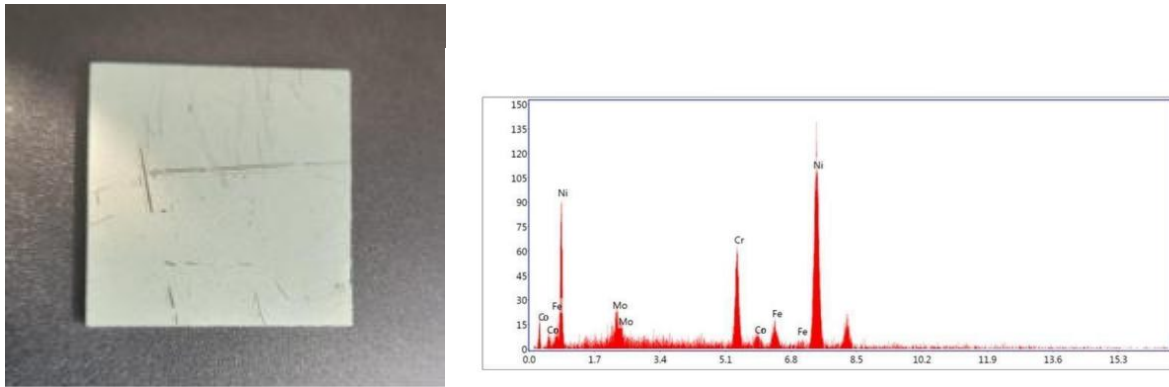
a) Workpiece before machining. b) EDAX of the Inconel 625
